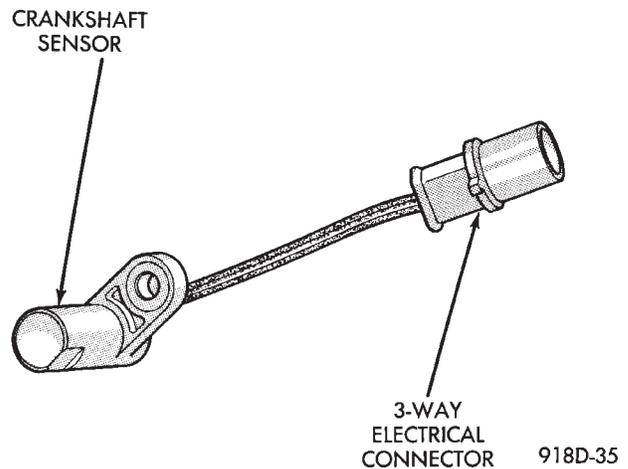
Crankshaft Timing Sensor—Turbo III Engine
